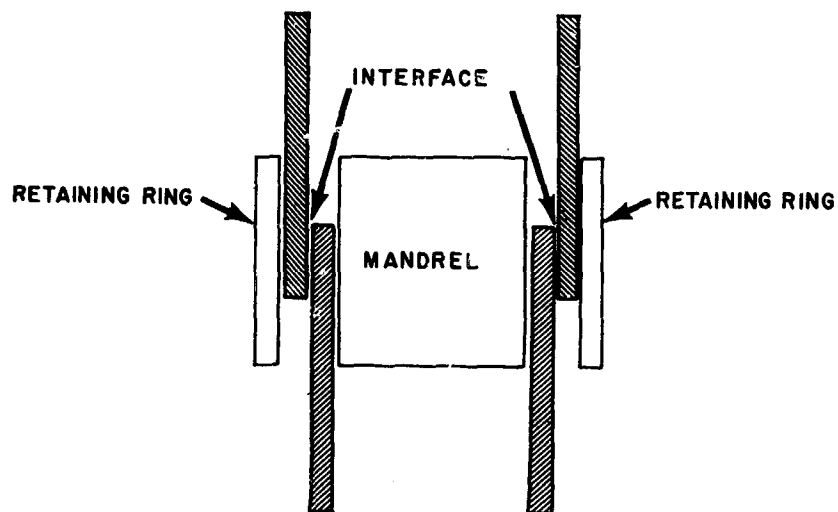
Joining Overlapped Tubes by Differential-Thermal-Expansion Welding
